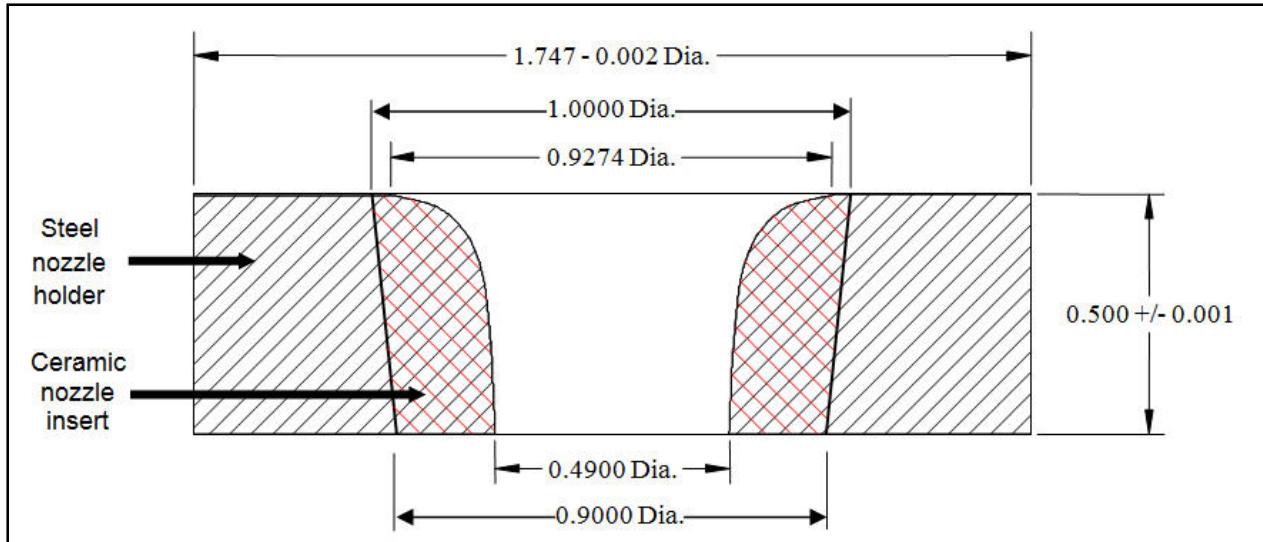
Nozzle assembly for the blow-out gun test. Dimensions are in inches.
